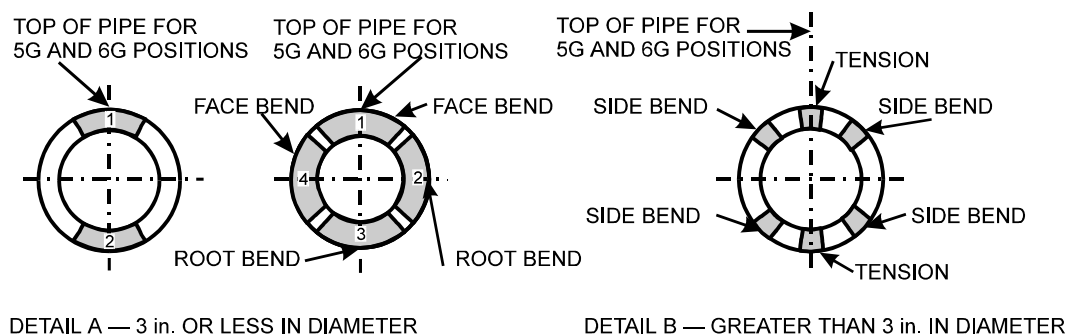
Location of Test Specimens on Welded Test Pipe (see 5.17.4.3)
